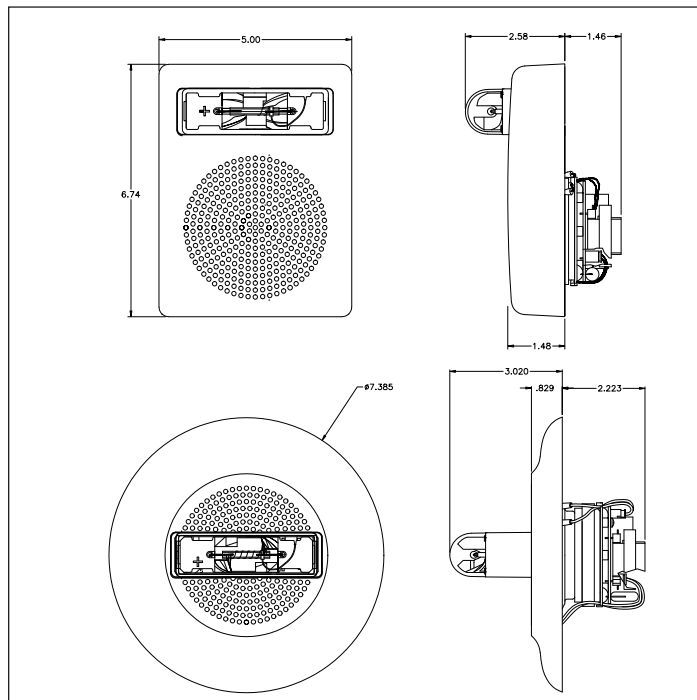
E60H (top) and E60H (bottom) Speaker Strobes - Front & Side Views
